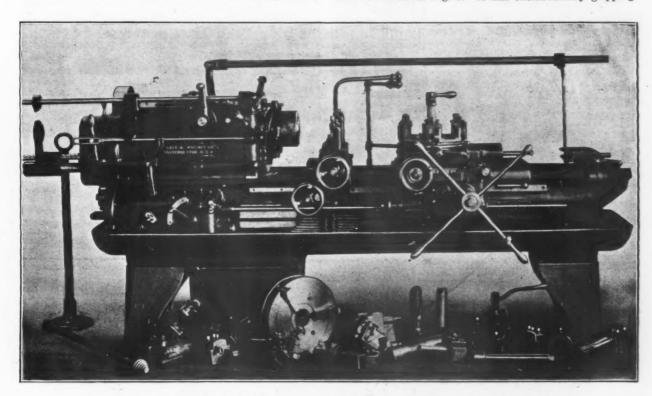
The New 21/2 x 26 In. Turret Lathe Built by the Pratt & Whitney Company, Hartford, Conn.
